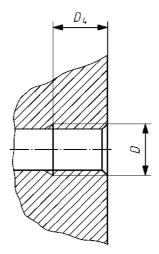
Dimensions of pressure connections for remotely mounted pilot valves
